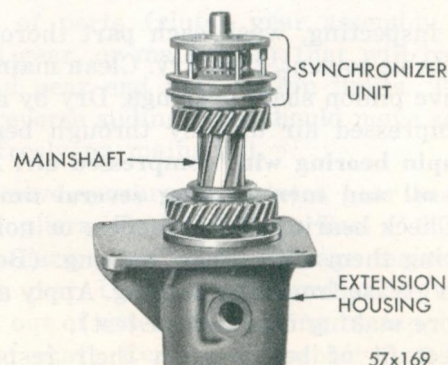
Synchronizer Unit Assembled on Mainshaft
